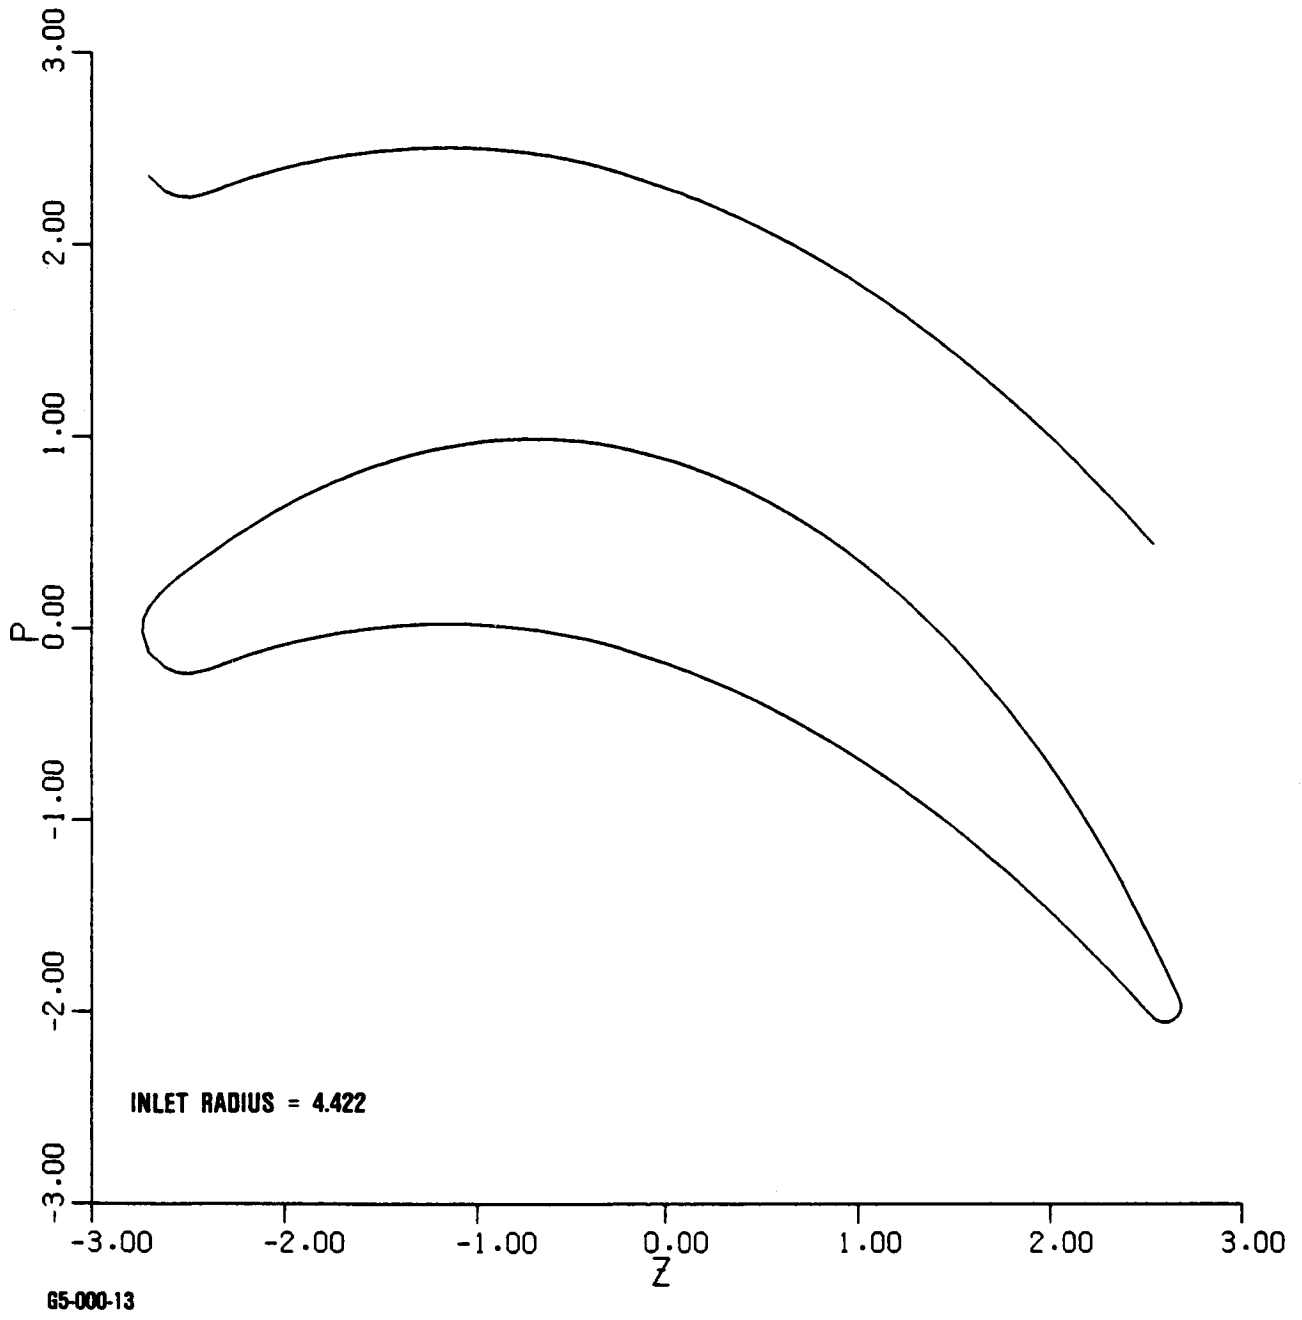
MATE TFE731 HP Turbine Blade Design Section 2.
